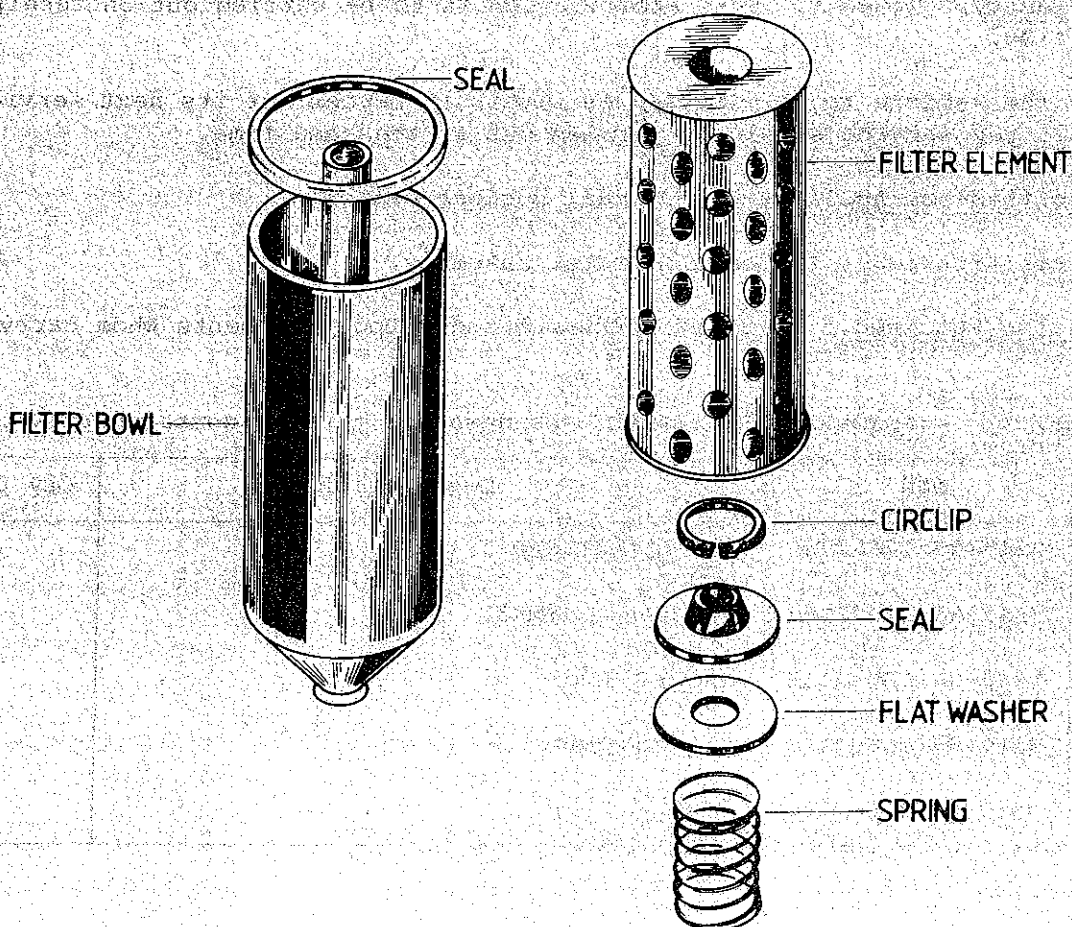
ENGINE OIL FILTER AND COMPONENT REPLACEMENT SEQUENCE
